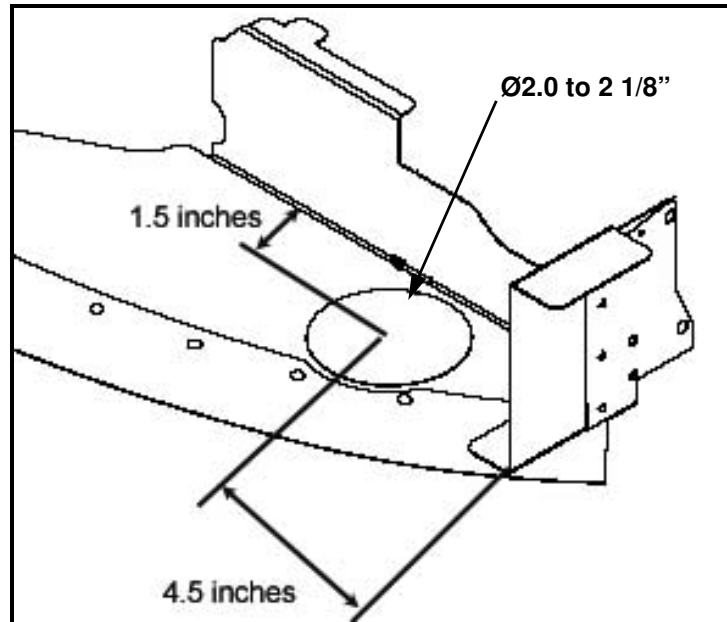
Cabin Heat Intake Location on Front Baffle
